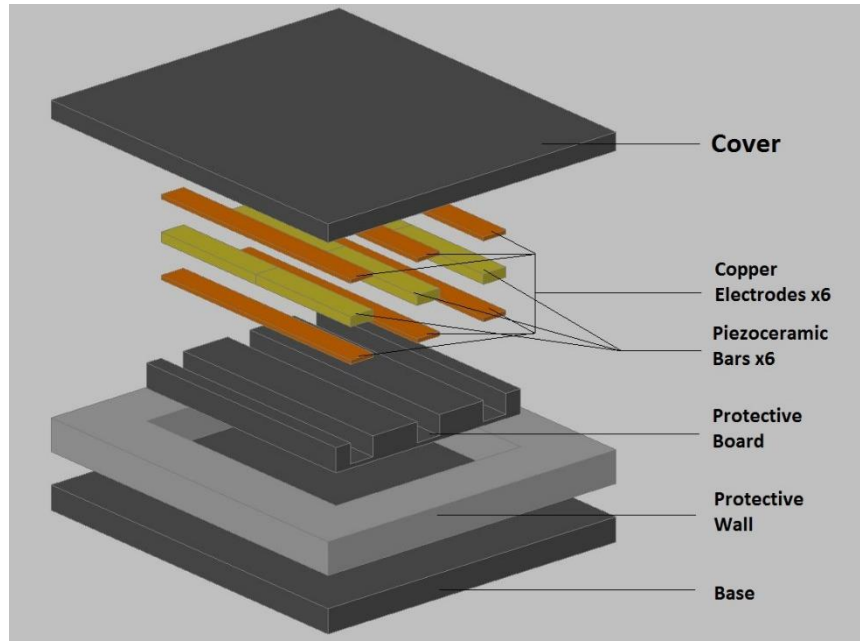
Chart. Three dimensional view of the Assembly Design VI (disassembled).
